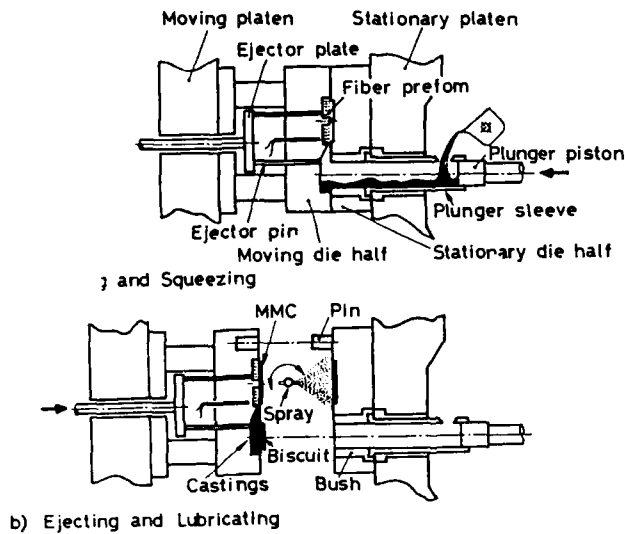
Indirect squeeze casting operations with a horizontal type of machine.
